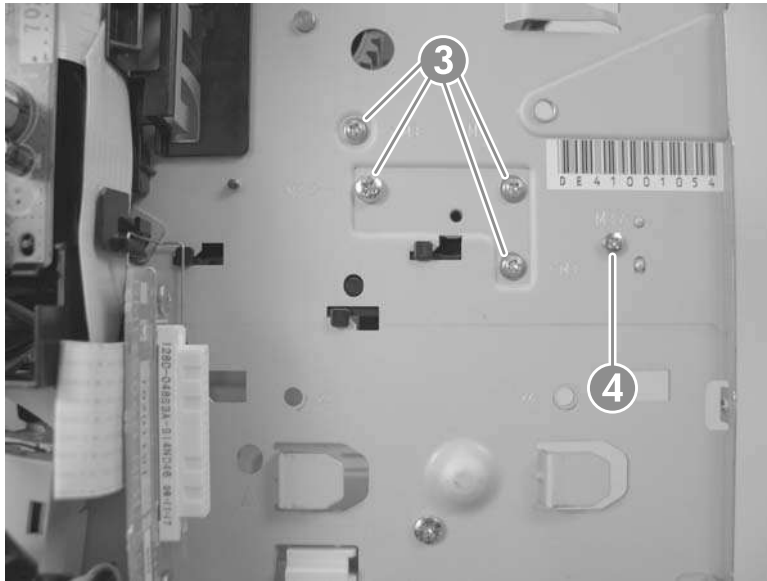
Remove the high-voltage power-supply assembly (1 of 7)
